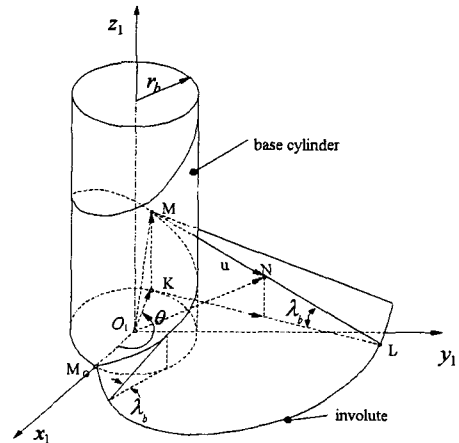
Schematic drawing showing the generation of screw involute surface of right hand worm.
